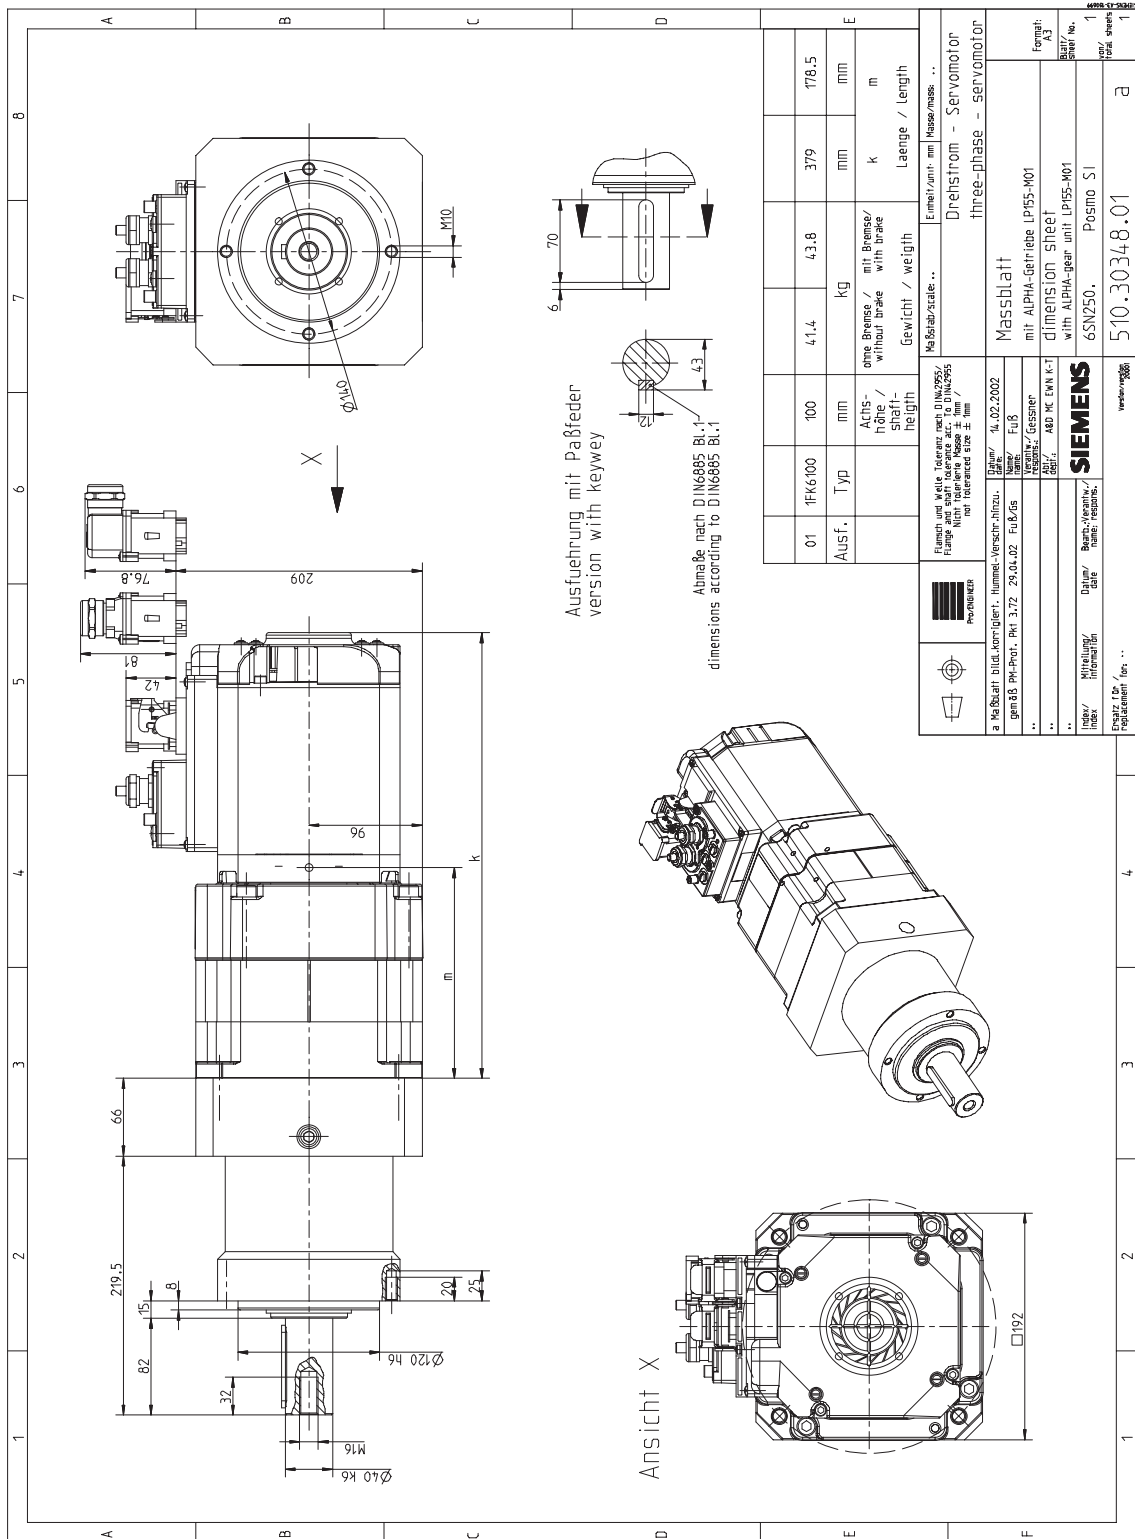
Dimension drawing POSMO SI 6SN2500-2CF00-0G□□ with gearbox LP155-M01
